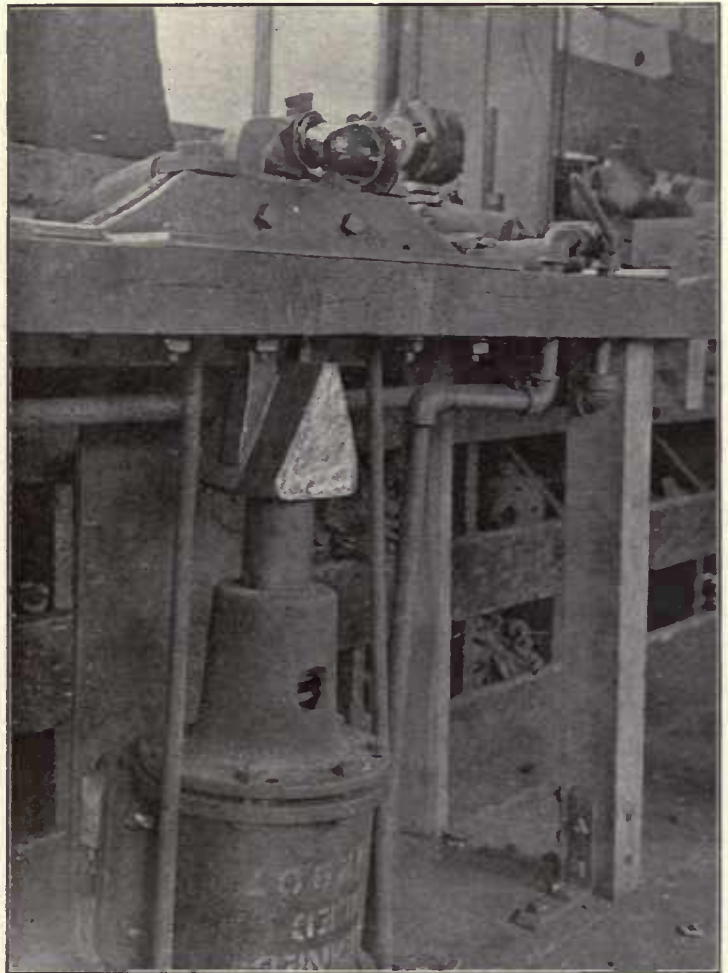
Device for Tightening Clamps on Air Brake Hose.
